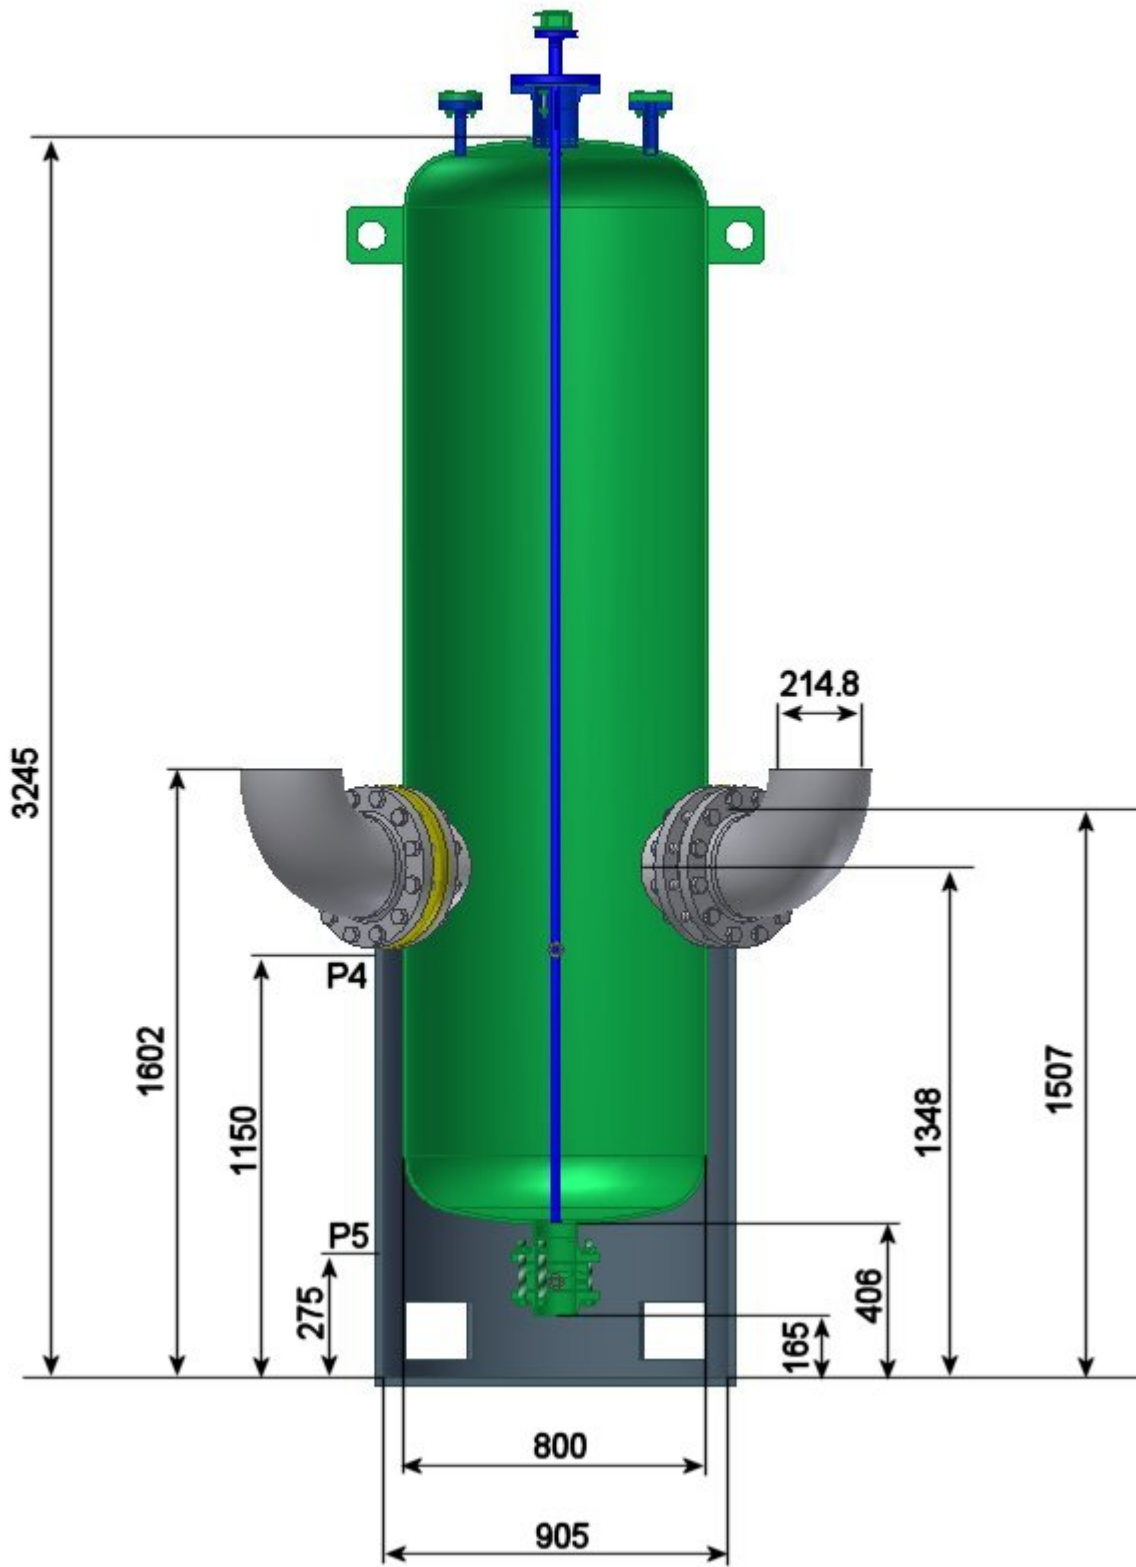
Dimensions of the cavity and RPV (hand holes are closed during test)
